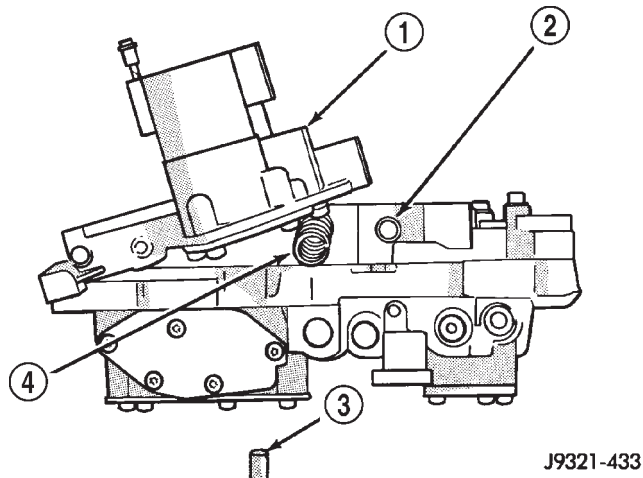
3-4 Shift And Converter Clutch Valve Springs And Plug
